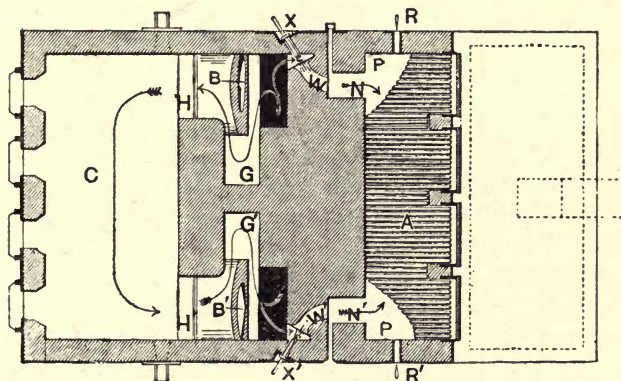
Sectional Plan of new form of Siemens Re heating Furnace.
